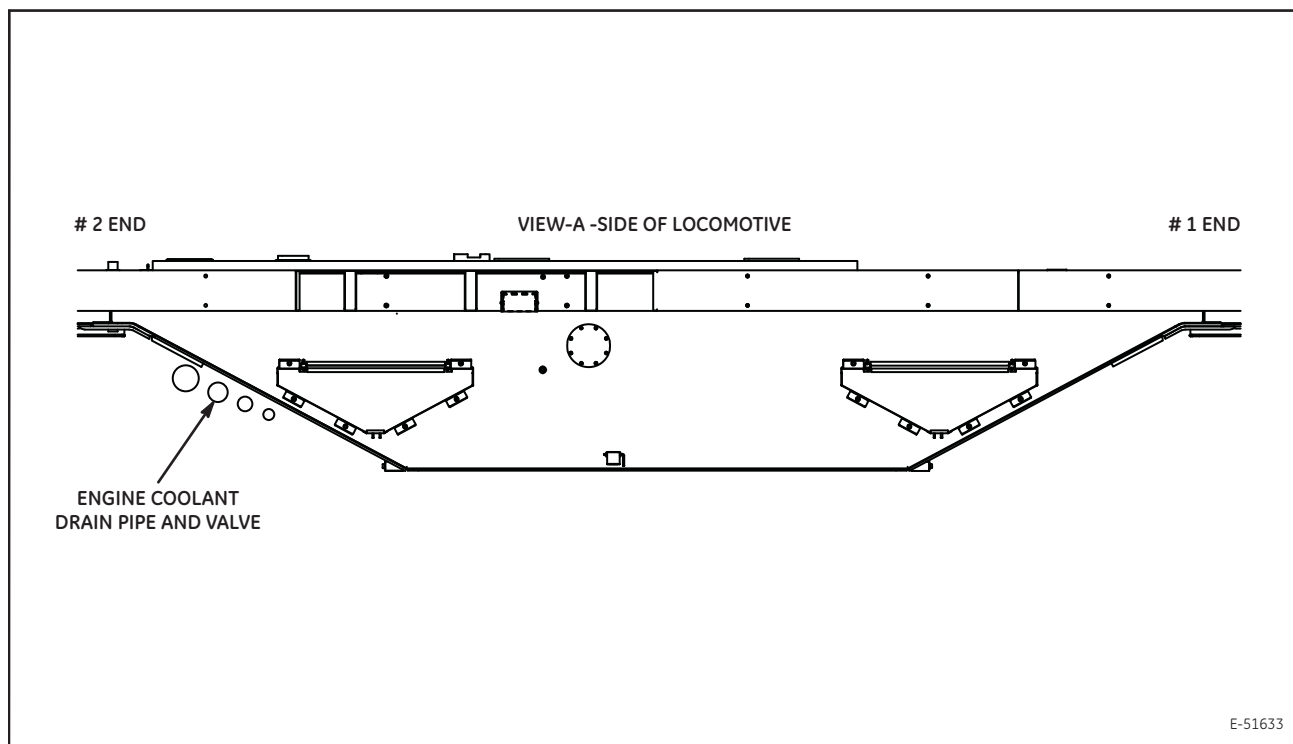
Location of Engine Cooling Drain Valve (PH37ACmi Unit Shown)
